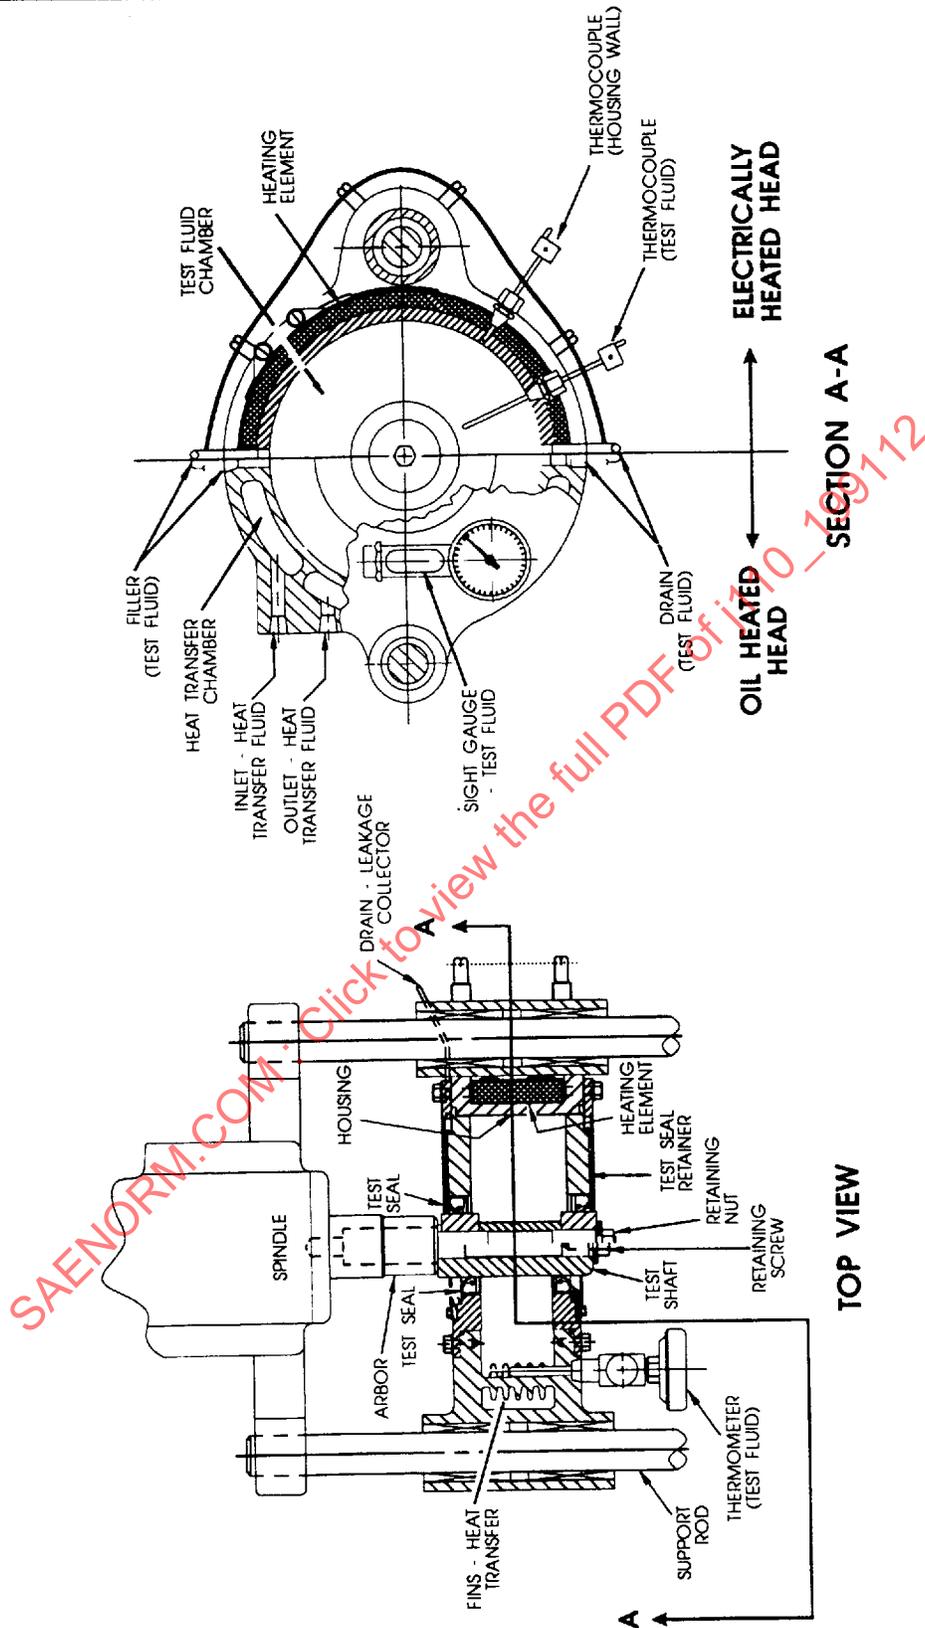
SCHEMATIC SHOWING TOP VIEW/CROSS SECTION OF STANDARD OIL OR ELECTRICALLY HEATED SEAL TEST HEAD
